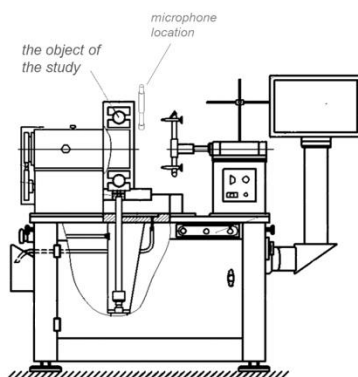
Scheme SP-180 Bearing Input Control Stand.
